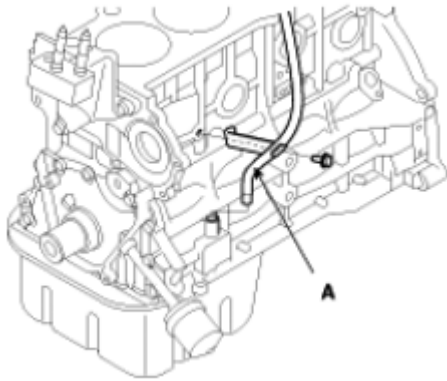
Identifying Oil Level Gauge Tube With Bolt
